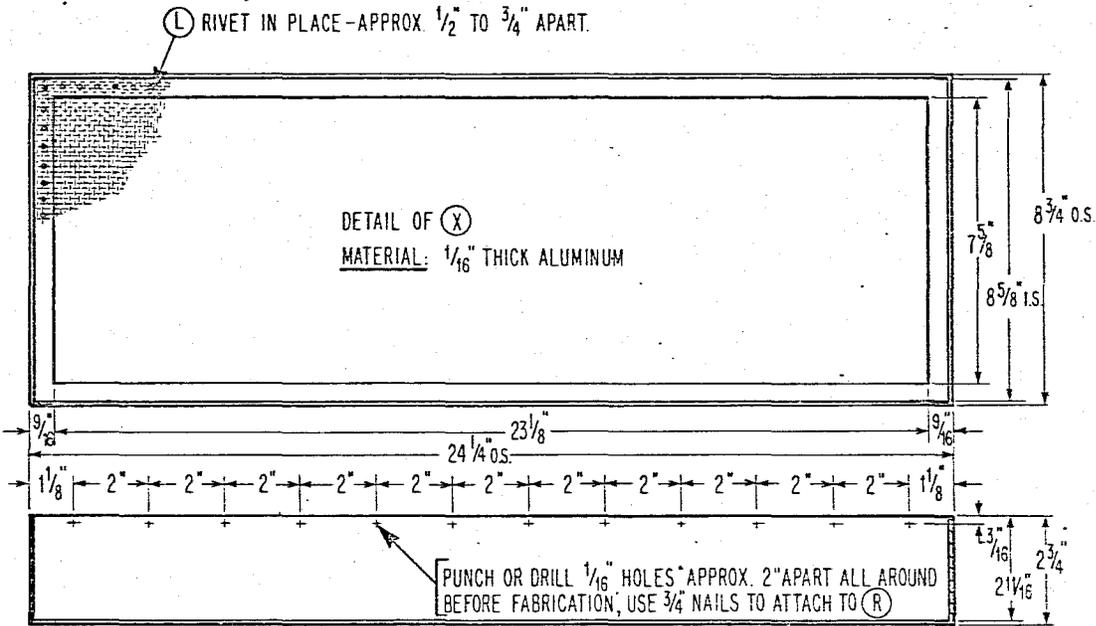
FILTER RETAINER AND BASE SUB-ASSEMBLY DETAIL
